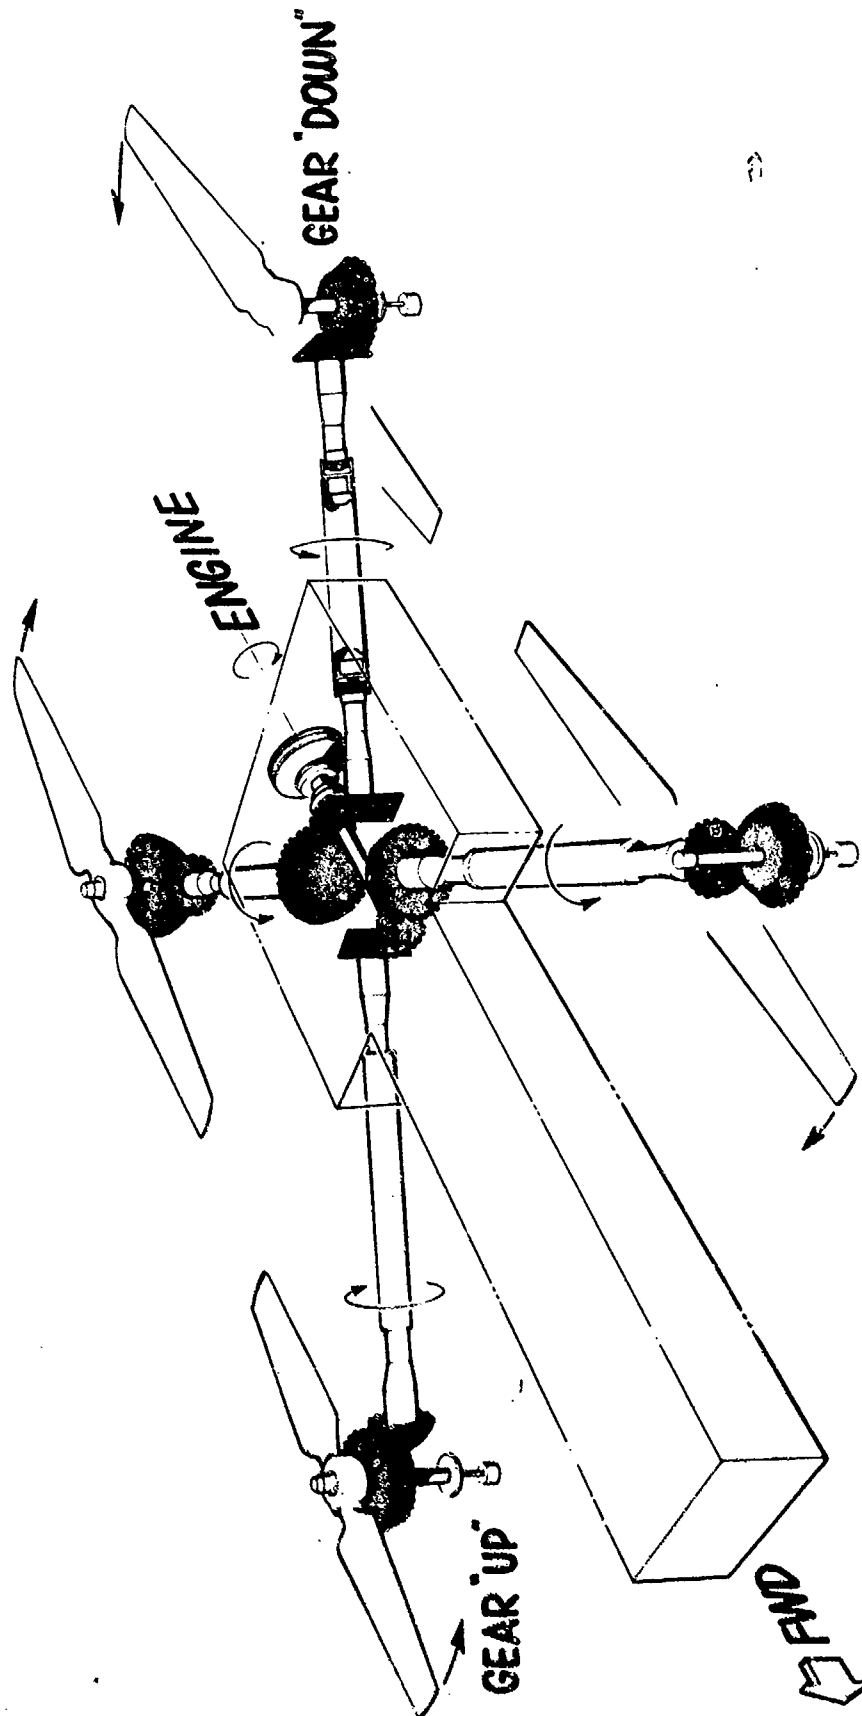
GENERAL ARRANGEMENT OF GEARS & SHAFTS
